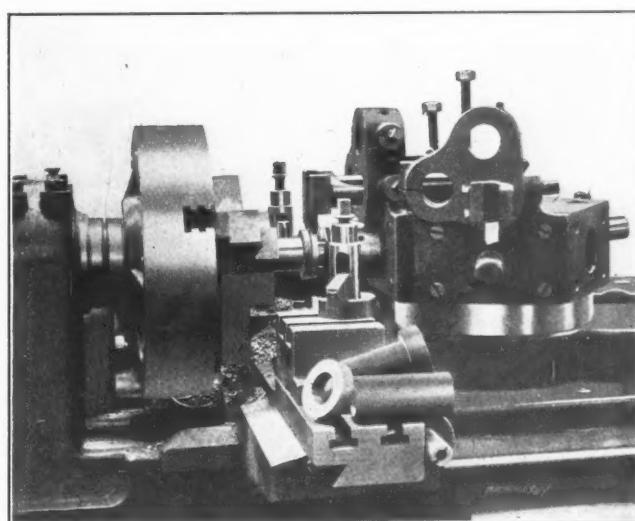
Front View of Machine set up for the Finishing Operation on the Recessed Bushing and Collar shown in the Foreground and in Fig. 4.
